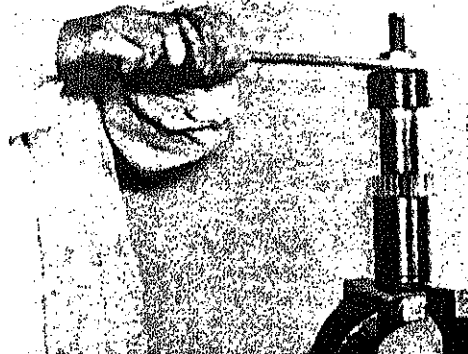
Removing the bushing of the tool chuck by means of tool 9201 0362. Use the same tool for fitting
